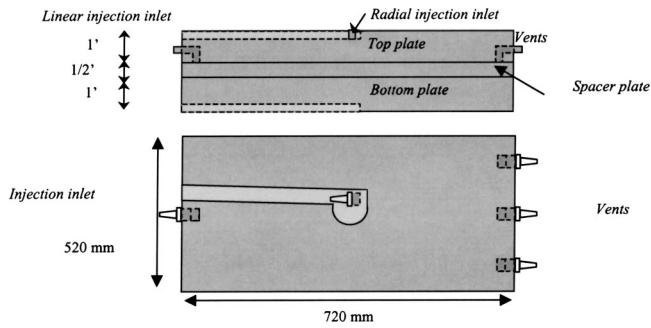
Schematic of the mold used for resin injections in a mold containing fiber preform. Top and side view.
